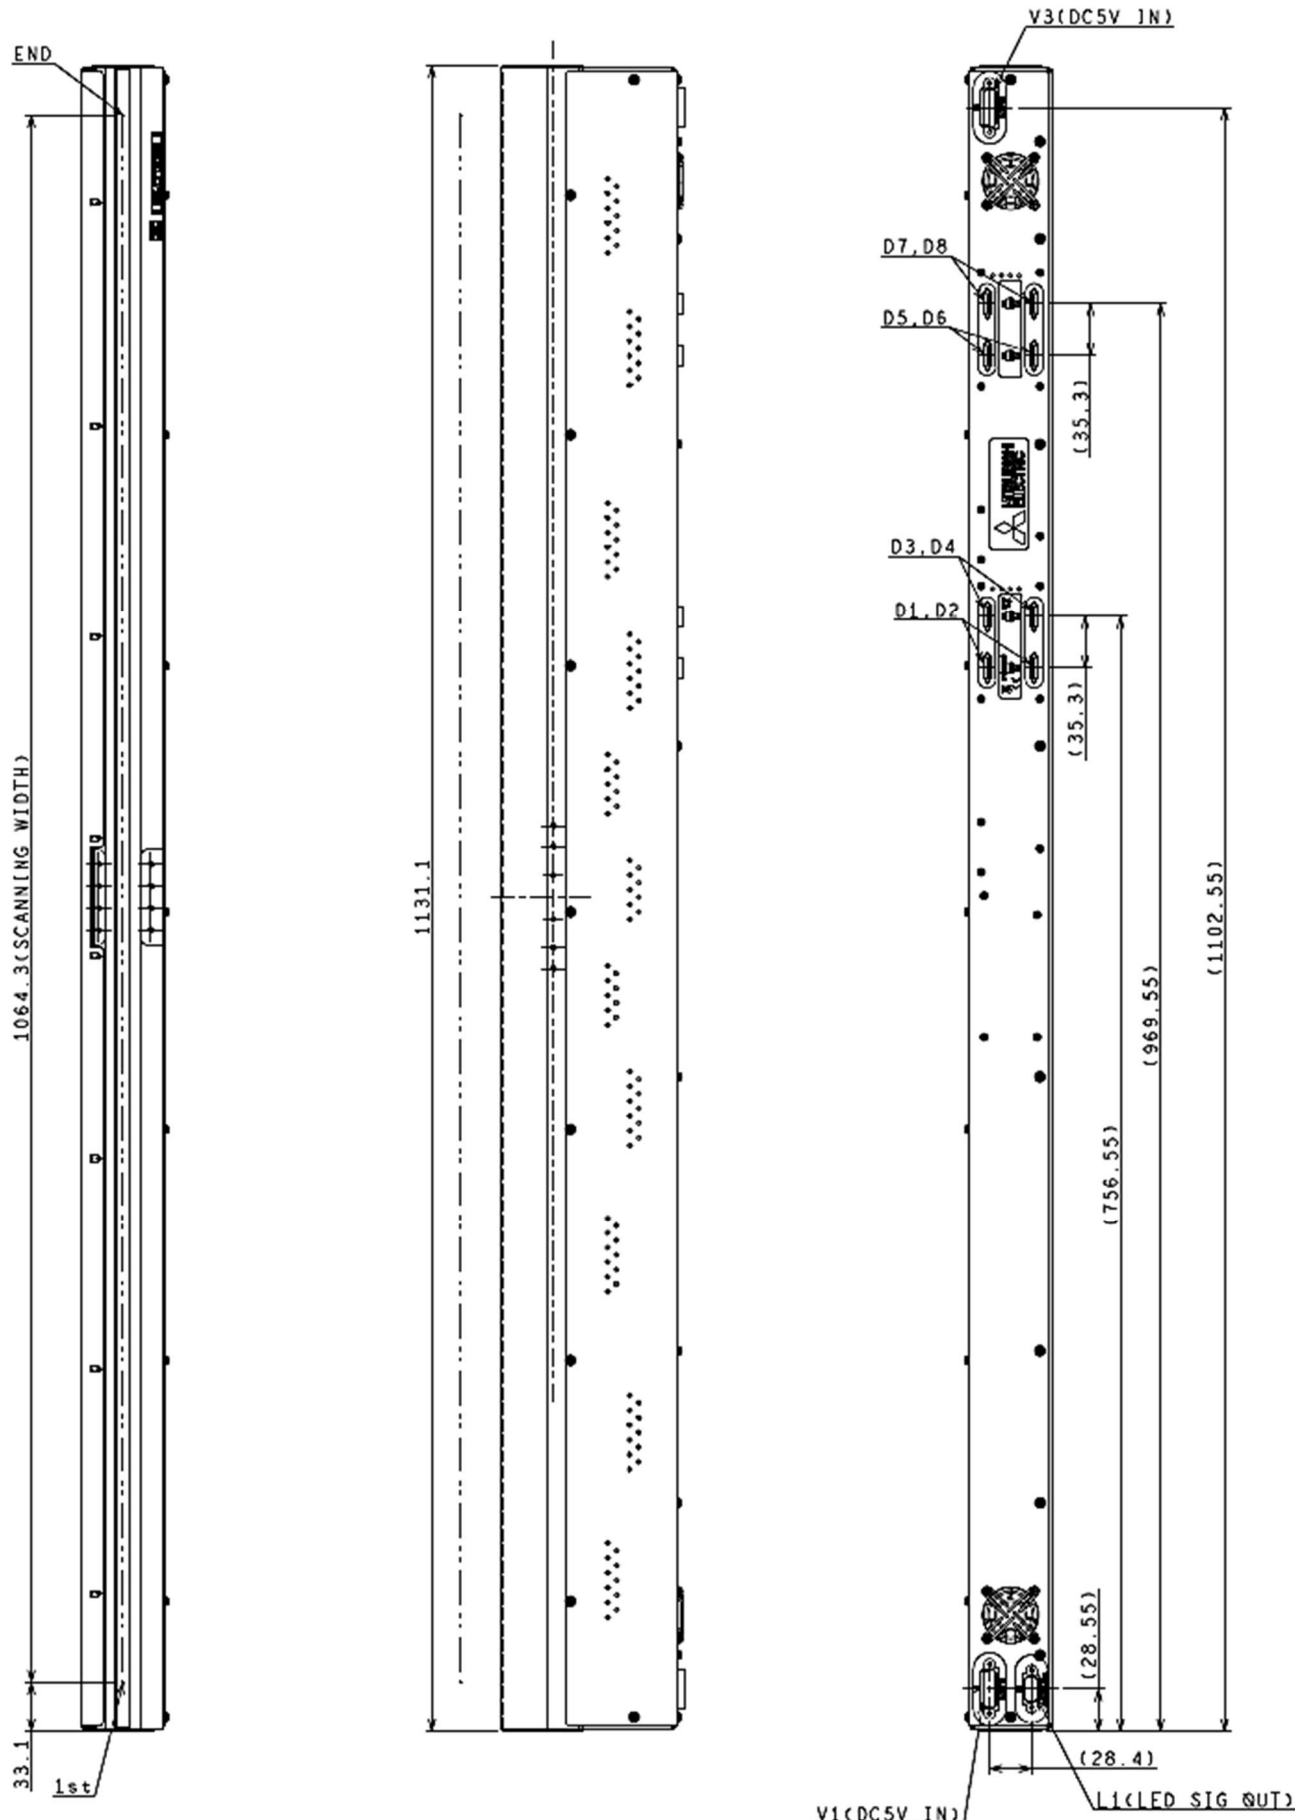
KD6R1064DXL-NL Outline drawing (at 24°C)
